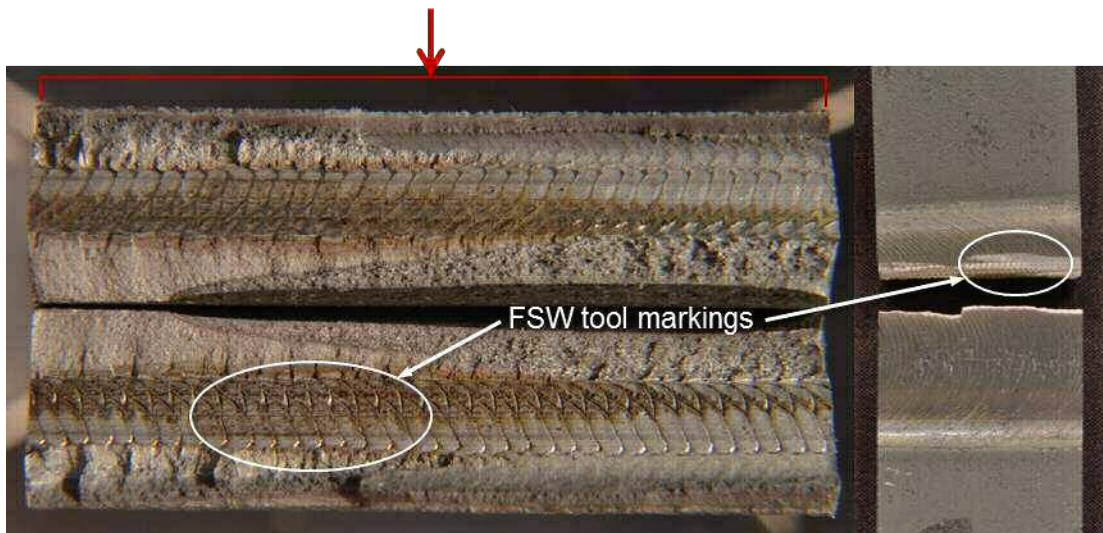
Fast weld sample tested at 80% of YS (222,272 cycles to fracture)
